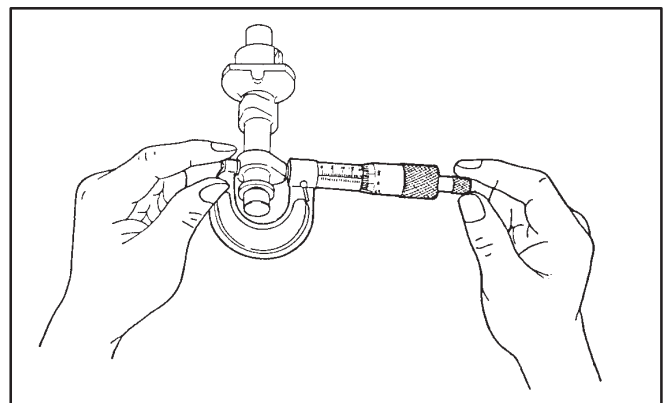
MEASURING CAMSHAFT LOBE HEIGHT
